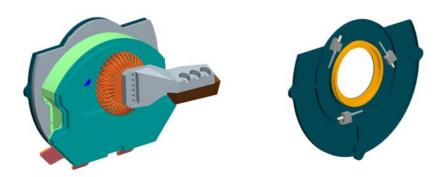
Overall view of the detector assembly (Hawaii 2RG) and a view inside with the three piezo motors
